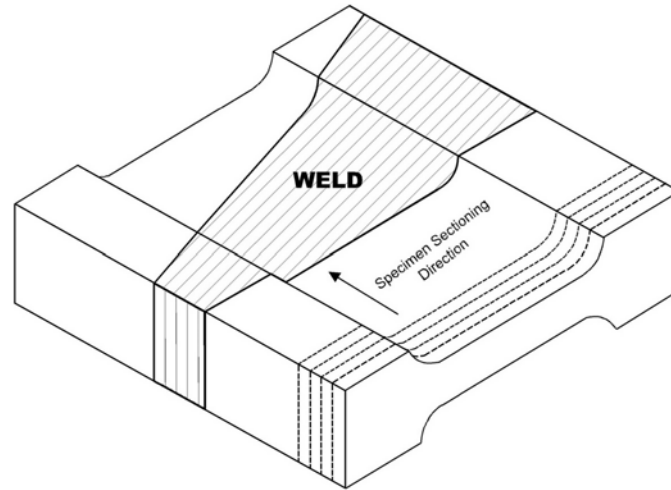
Extraction of MT specimens from vicinity of weldment of a pipe.
